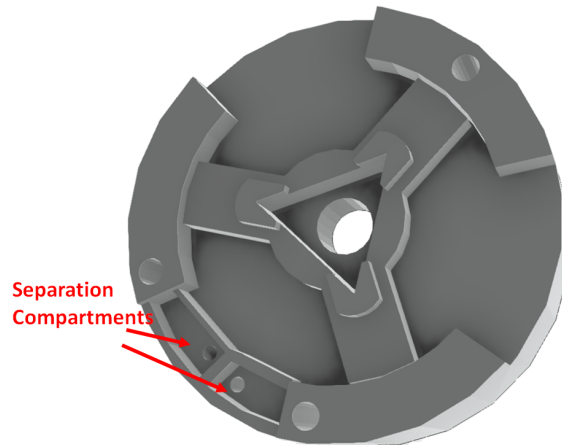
CAD image of 3D printed part with separation rooms for emitter and receiver to prevent optical crosstalk
